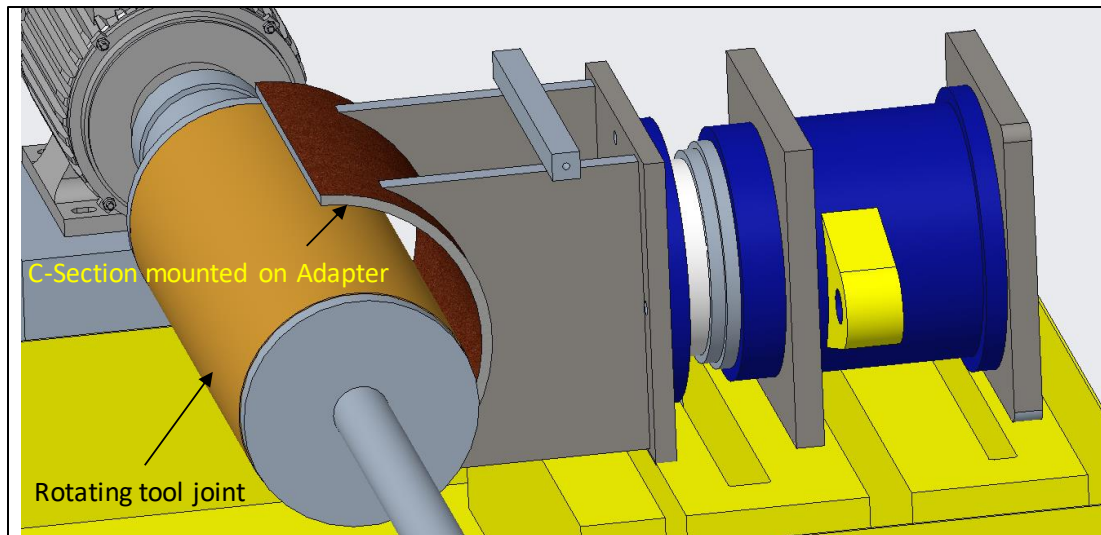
3 - Fixation of casing C-section on the pneumatic piston
